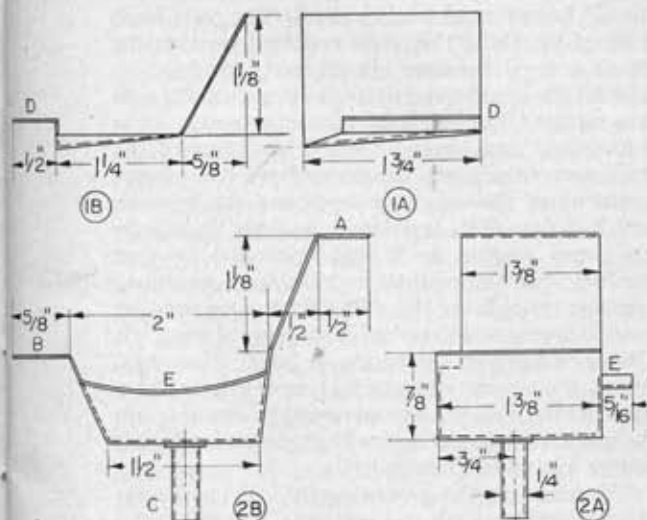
INTERNAL HEADSTOCK FUNNEL & CHUTE
